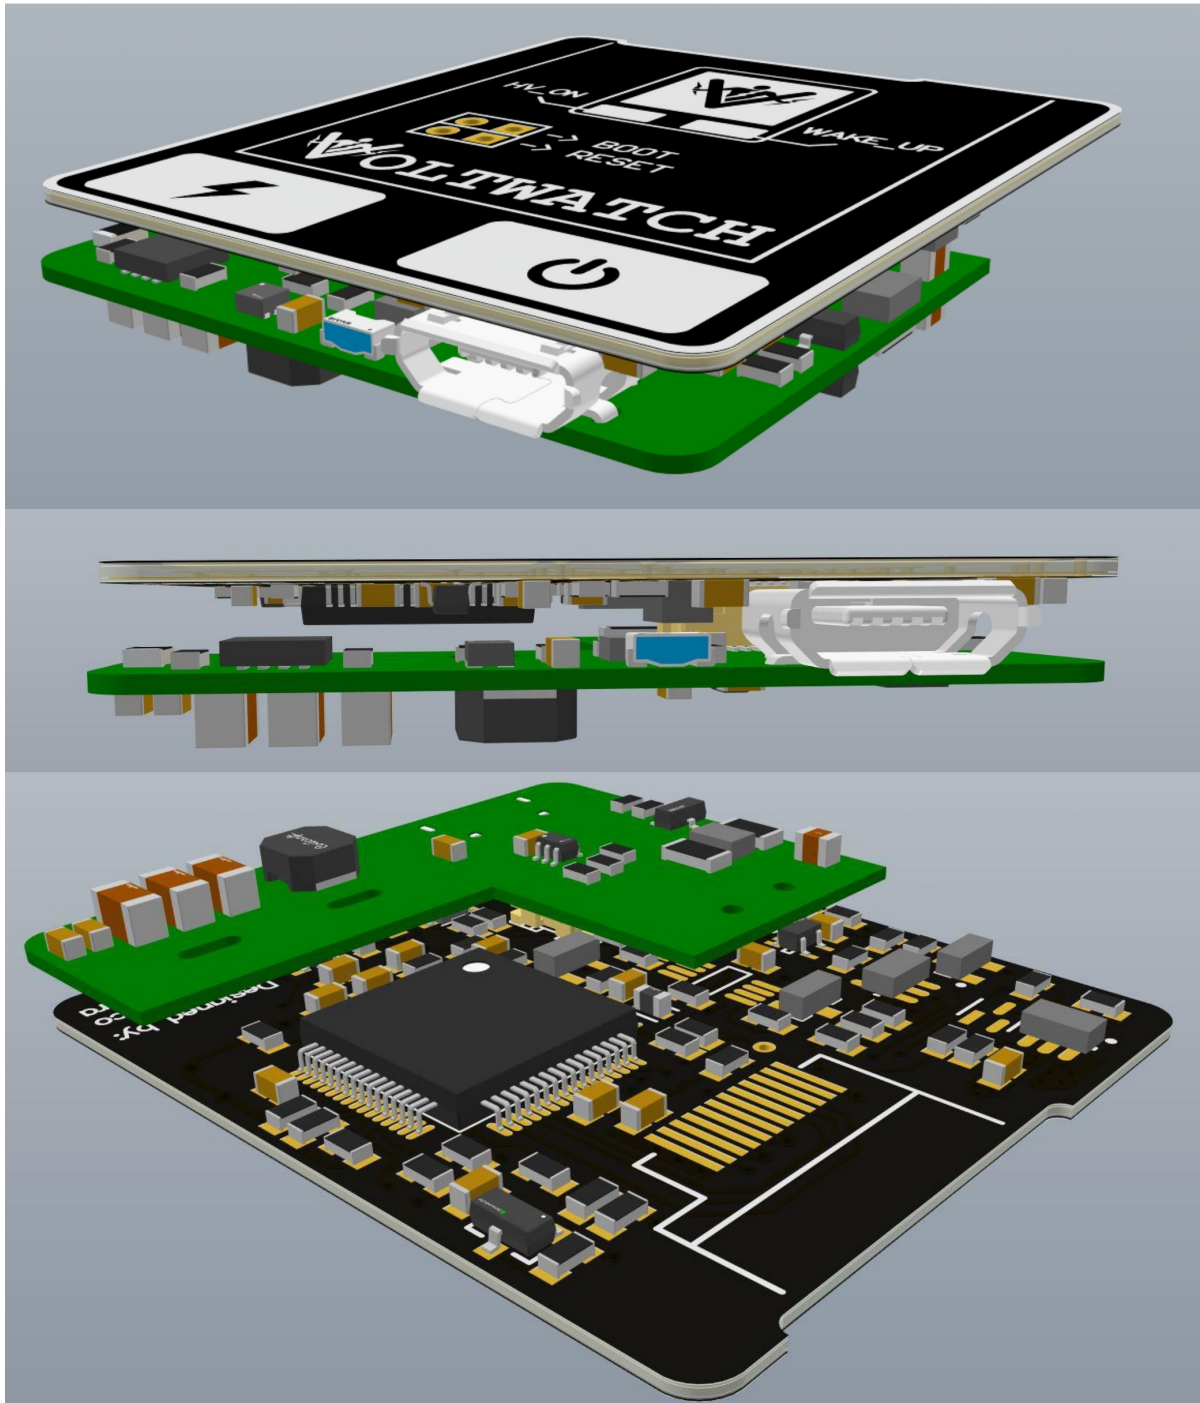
3D assembly of the PCB stack (not including the interface boards), the display is not present in this renders
